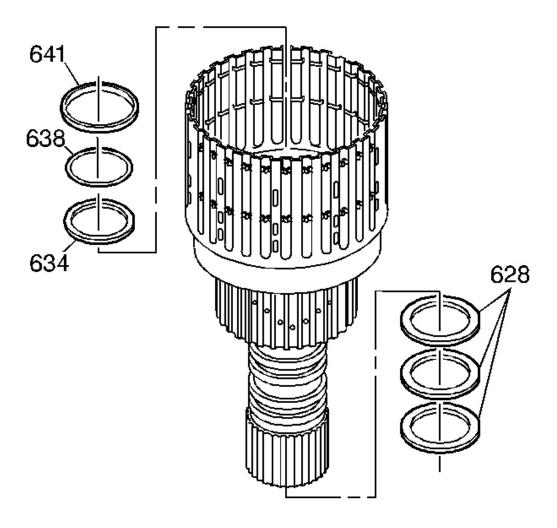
Identifying Third & Input Clutch Components Courtesy of GENERAL MOTORS CORP.
